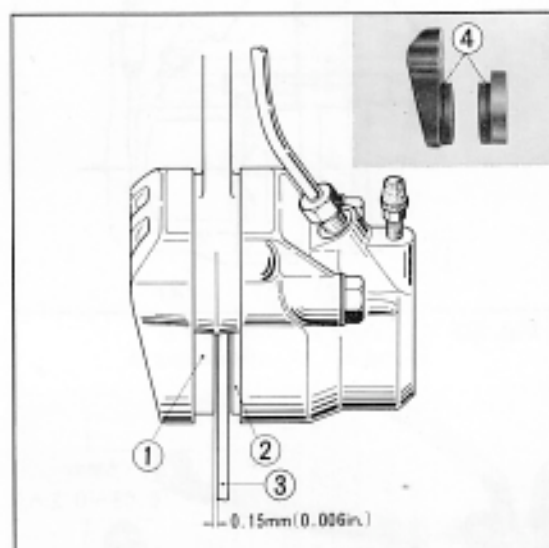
① Pad B ② Pad A ③ Brake disc ④ Wear limit indicator
